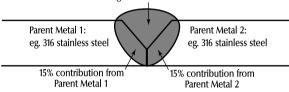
Example of 30% dilution in a stainless steel butt weld using the GMAW process with Autocraft 316LSi welding wire.
